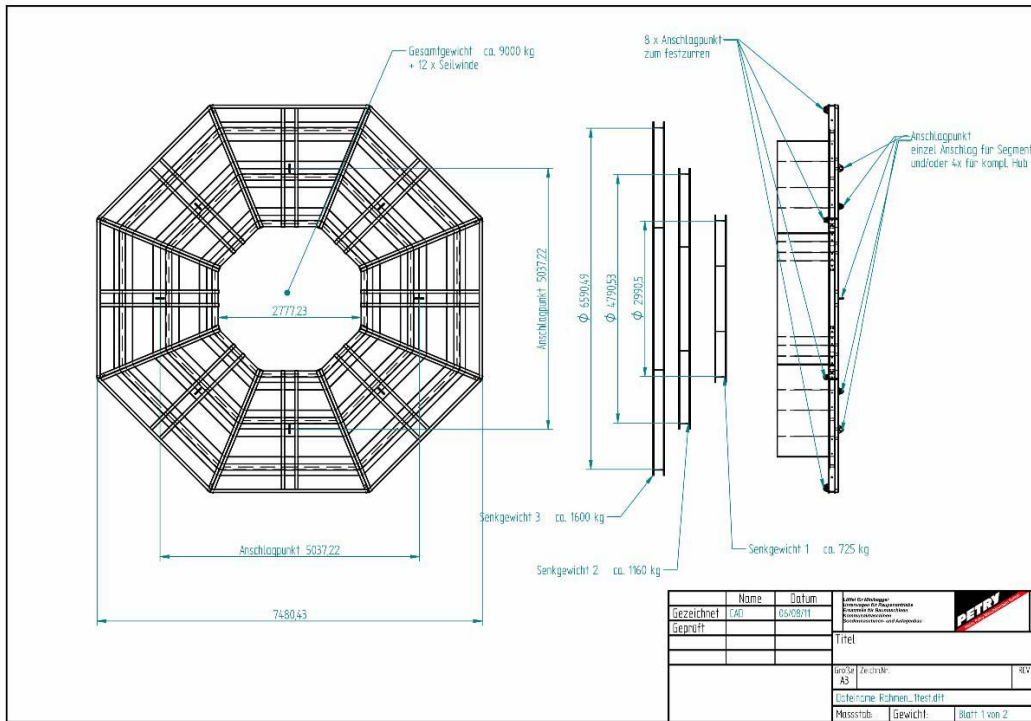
Design drawing of the ESRa HSD platform (source: TU Braunschweig/Dr. Elmer)
